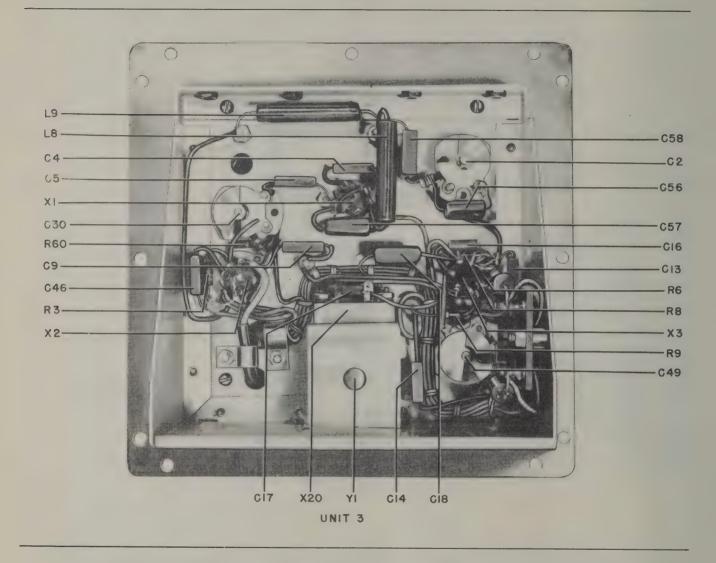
Radio Frequency Oscillator O-165/UR, Inner Oven, Tuning Unit Removed
